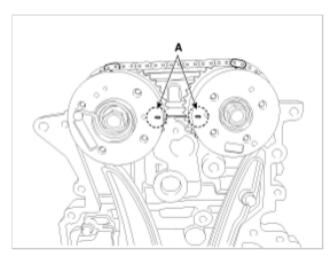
Identifying Marks On Intake And Exhaust CVVT Sprockets Courtesy of HYUNDAI MOTOR AMERICA
